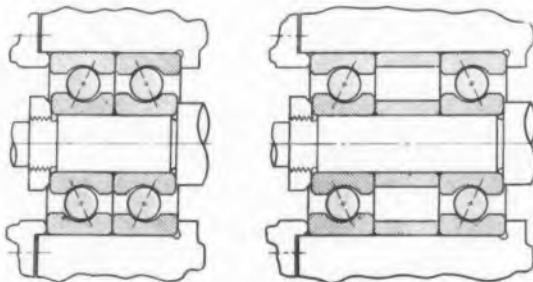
Back-to-back preloaded duplex pair may be mounted contiguously, left, or with spacers, right. It provides high moment rigidity and is preferred when shaft runs hotter than housing. If bearing or pair is used at opposite end of shaft, it must have axial clearance to avoid thrust constraint.
